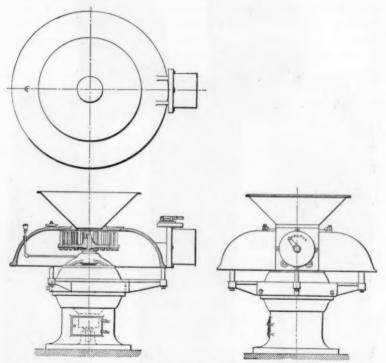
SECTIONAL DRAWING OF CENTRIFUGAL SAND MIXING MACHINE MOTOR DRIVE
